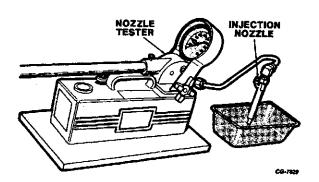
Mount Nozzle Assembly to the Hand Test Pump
